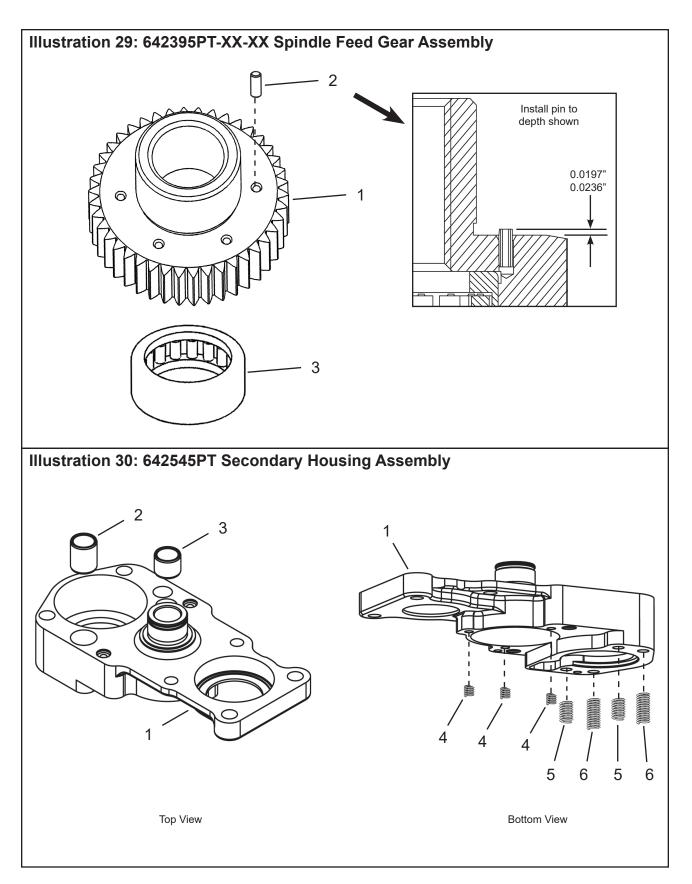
" - 642395PT-XX Spindle Feed Gear Assembly
